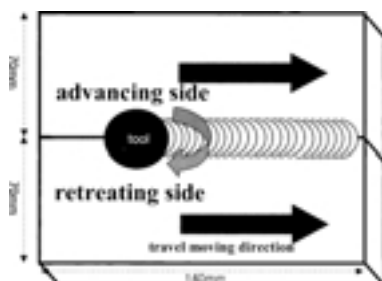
Schematic illustration of each weld side and welding process.
